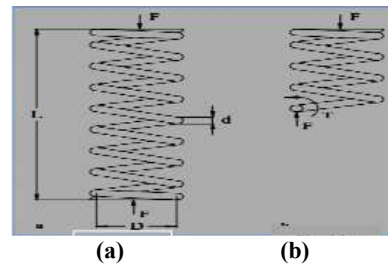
(a) Helical spring with axial load and (b) free body diagram.
